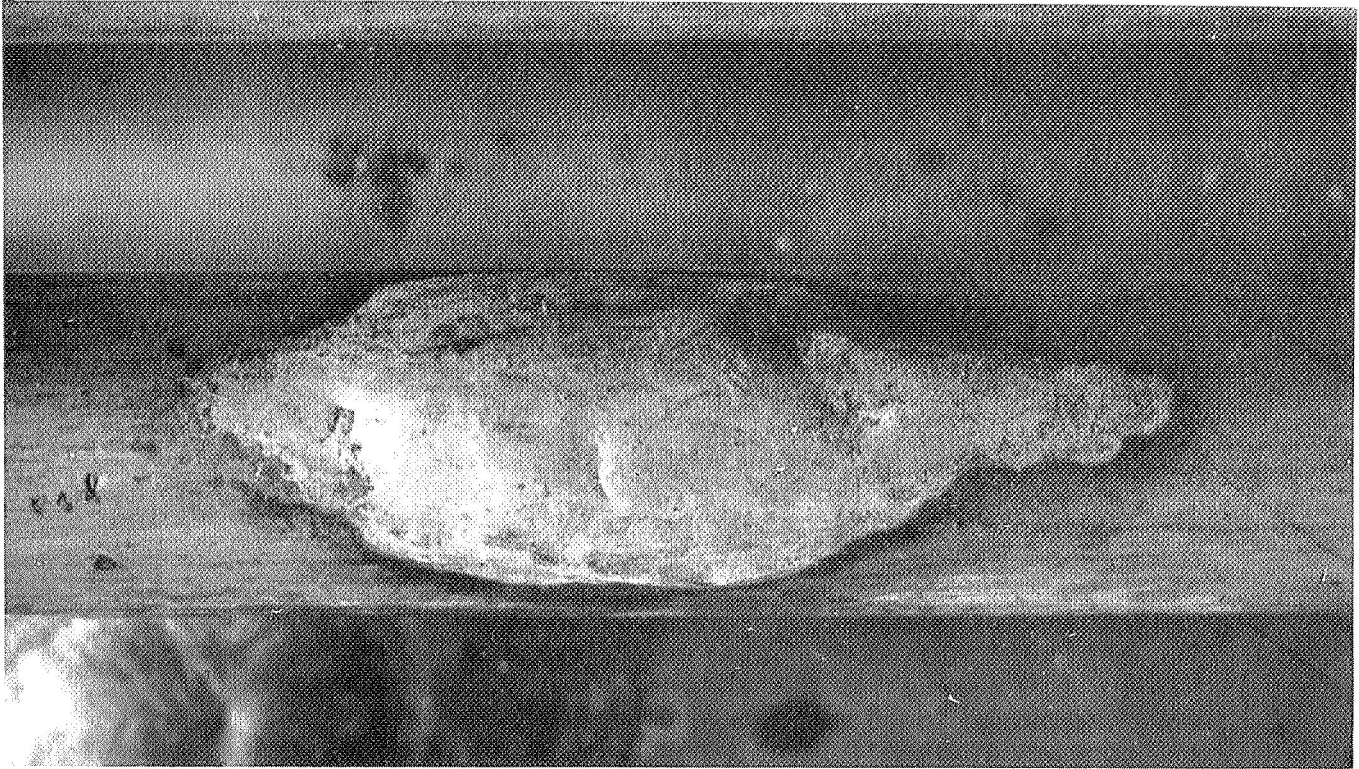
Simulated Repair Specimen Per PA4058-18B (Soft Solder) Passed All Tests
